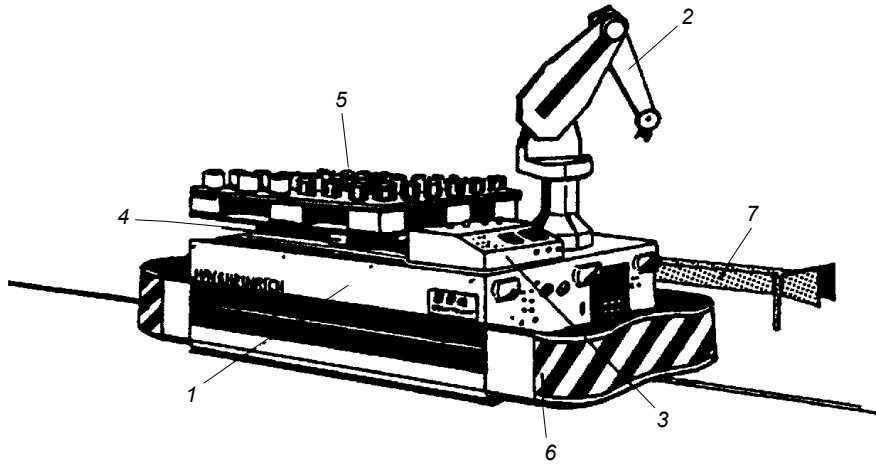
Movable robot mounted on an AGV: 1 - wire guided AGV, 2 – industrial robot, 3 - robot control unit, 4 - rotary index table (4 x 90 0), 5 - pallet, 6 - safety bumper, 7 – power supply connector
